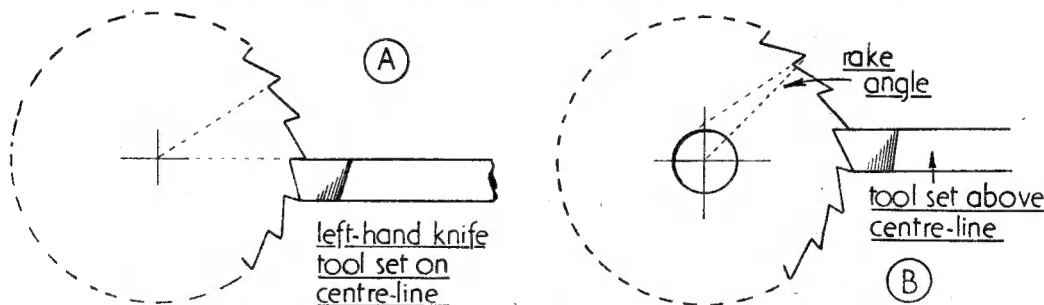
"A"—teeth formed radially with a knife tool; "B"—undercutting the teeth
